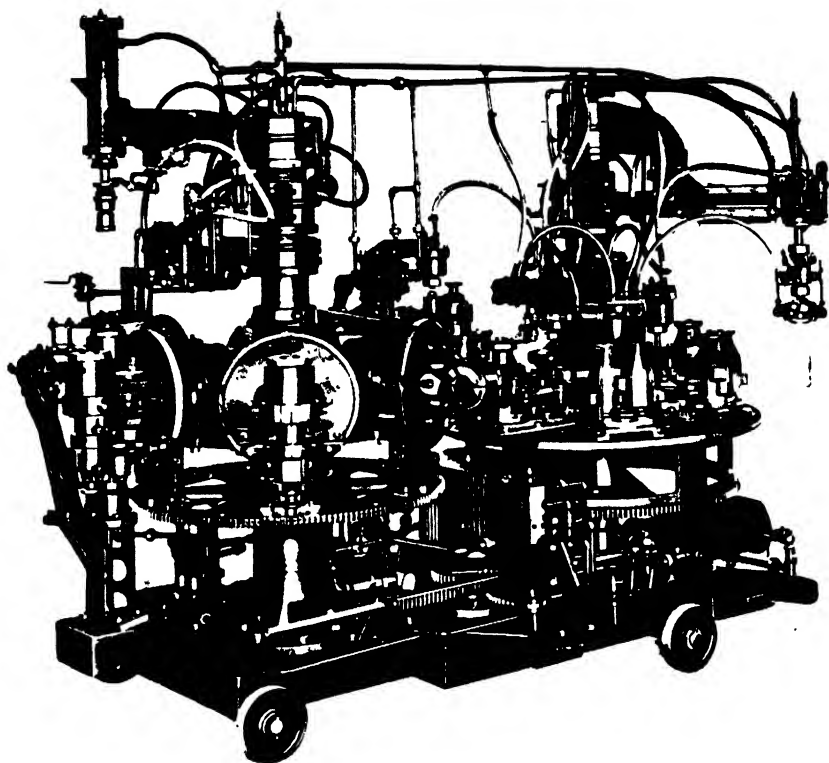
THE O'NEILL MACHINE, NO. 25.
